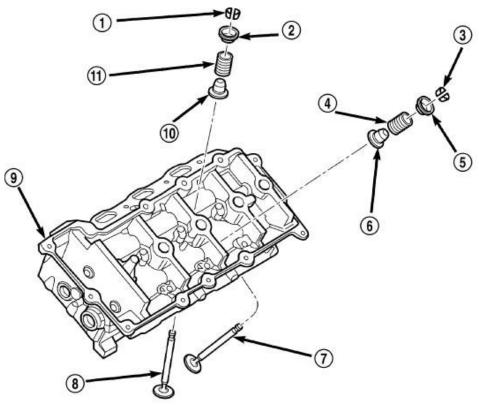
Cylinder Head, Valves & Springs Courtesy of CHRYSLER LLC
